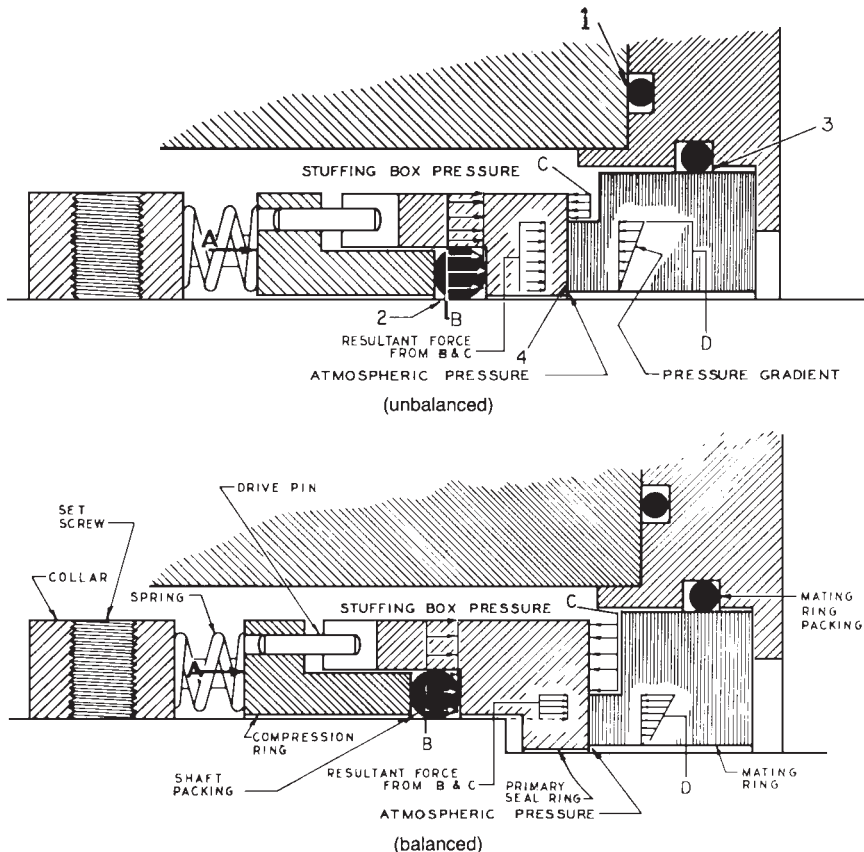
Unbalanced seal and balanced seal with step in shaft.
